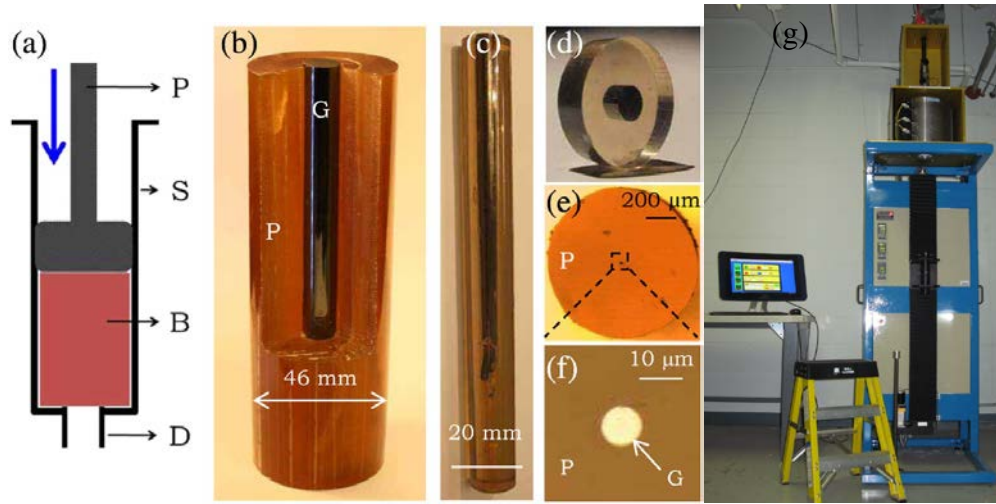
5 (a) Extrusion system. P, piston; S, sleeve; B, billet; D, die. (b) A hybrid polymer (P: PES) and ChG (G : As_2Se_3) billet. A section of the polymer was removed to reveal the structure. (c) Section of the extruded preform. (d) A disk (diameter 17.4 mm) cut from the extruded preform in (c). (e) Reflection optical micrograph of the fiber cross section and (f) the core. (g) Photograph of extruder in CREOL, UCF
